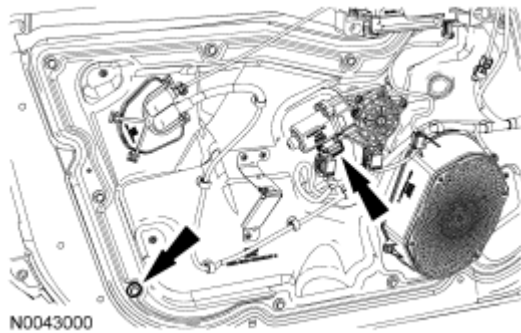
Locating Window Regulator Motor Electrical Connector And Door Module Bolts
